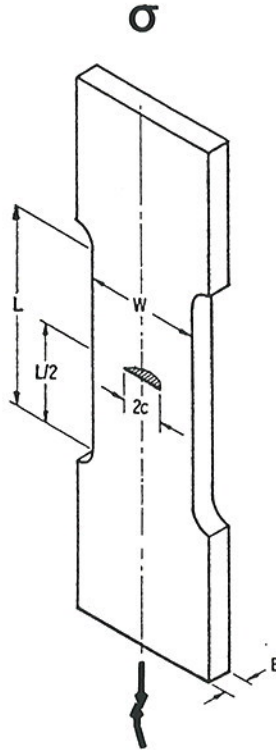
Schematic of the surface crack in tension specimen used in ASTM standard E 740-88.
